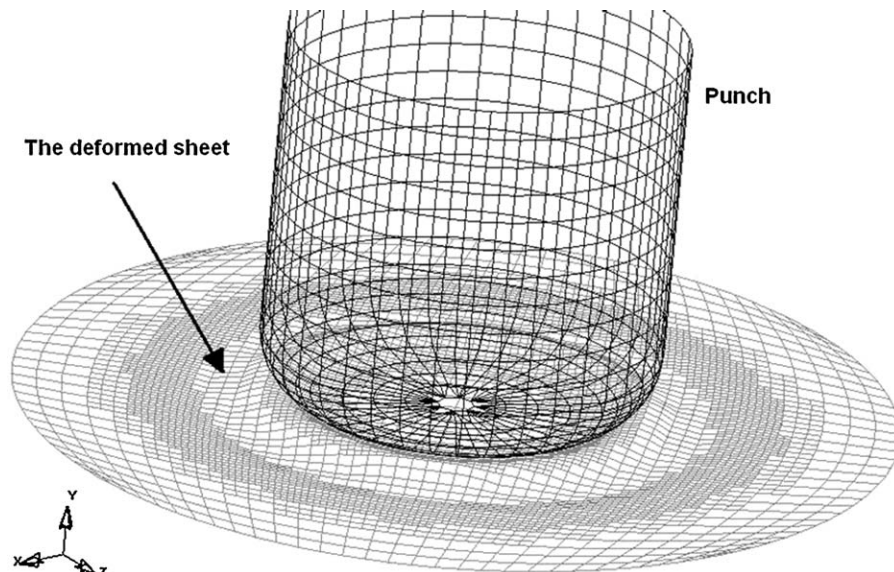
Showing the sheet deformation due to pre-bulging pressure and the contact of sheet (wrapping) with punch before drawing.
